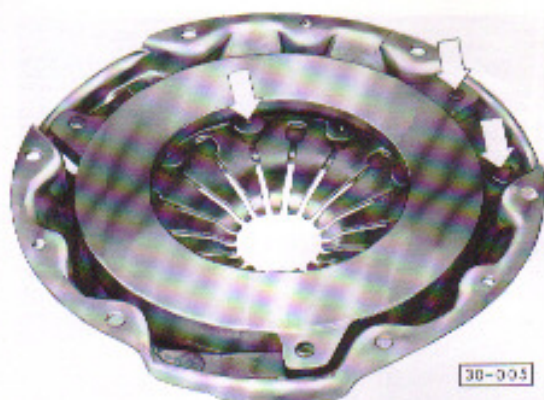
Check the spring connections between pressure plate and cover for cracks, and tightness of rivets
